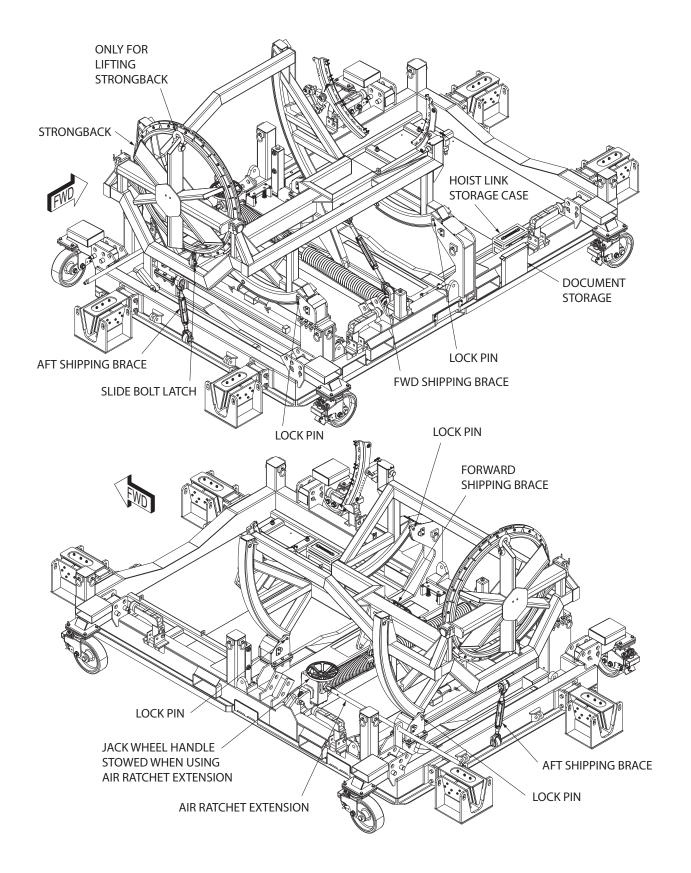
Stand Shown with Cradle in Upright Position
